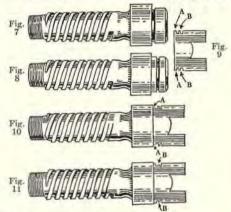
shows one of the earlier model shafts, with the recess for crimping cut very near the shoulder of the shaft.
